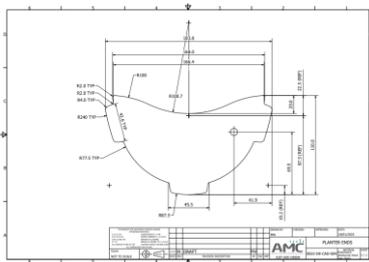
Drawing - 0022-DE-CAD-004 - Planter Ends
